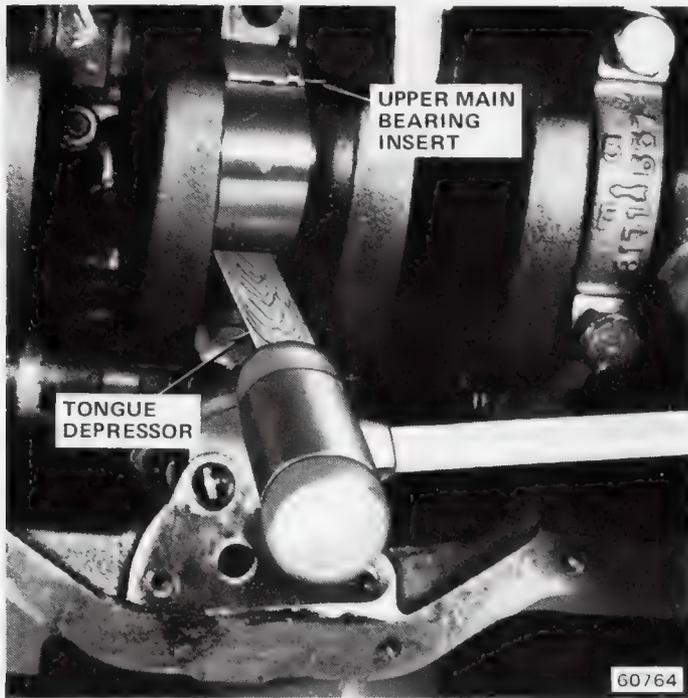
B-117 Removing No. 4 Main Bearing Insert
